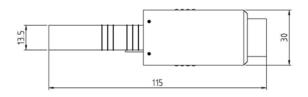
Dimensional drawing KLC1000/KLC2002 top view 1 Radial opening (with KLC1000 only)
